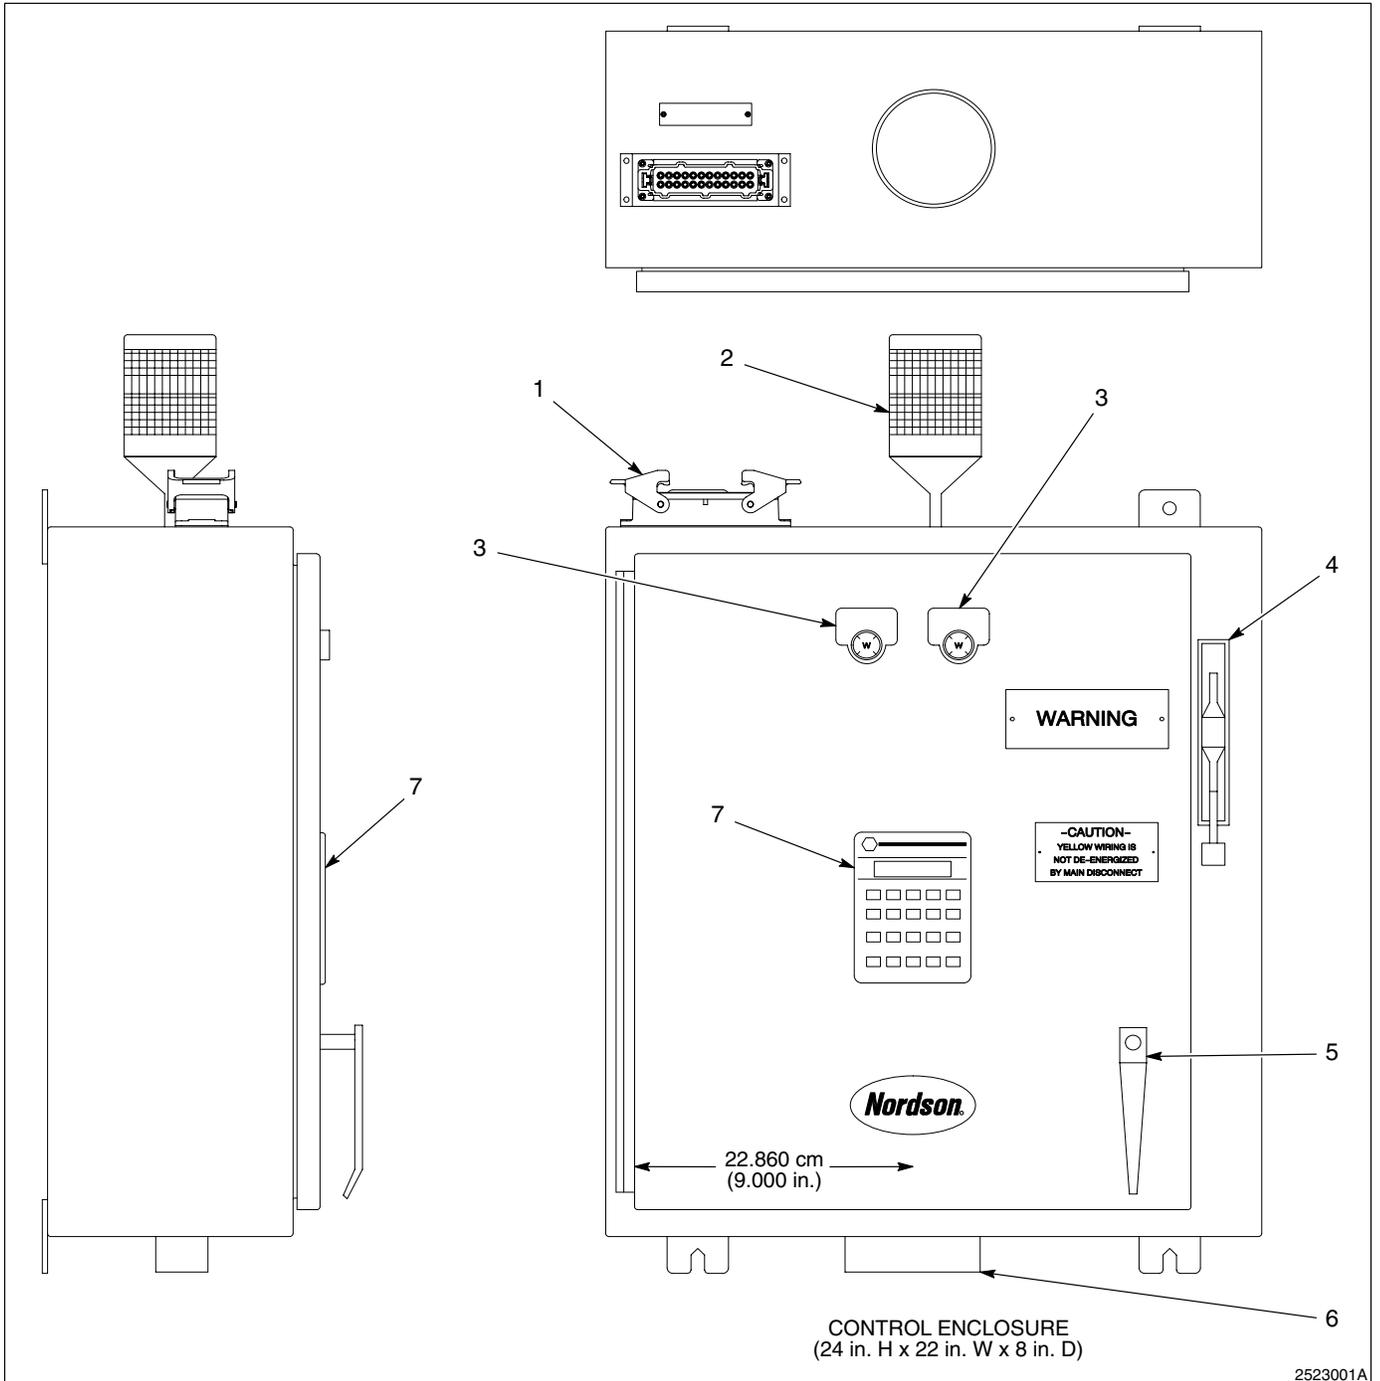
shows an Ejector gun controller, its main components, and basic dimensions.
